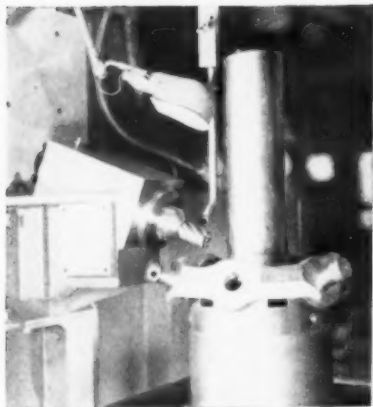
A special arrangement of the cam milling machine, in which the cutter is held in a tilted position for profiling the top and bottom of the rim on a Pratt & Whitney engine propeller reduction gear shaft.
